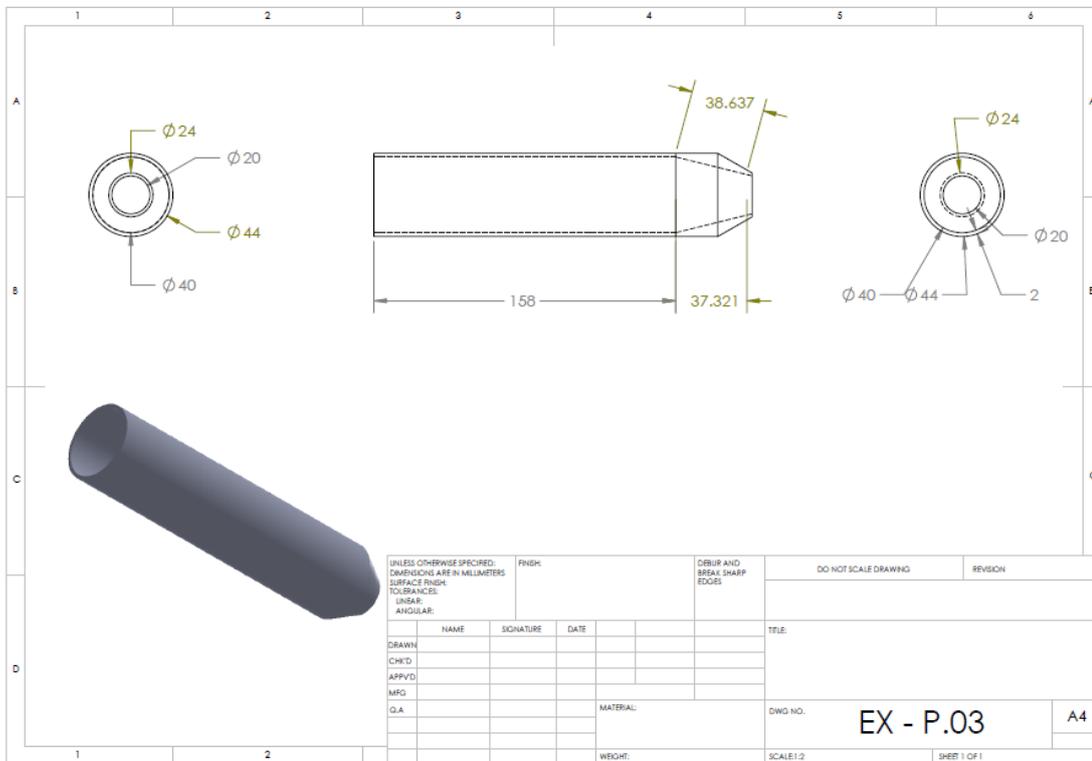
Two-dimensional drawings of assembled exhaust nozzle
